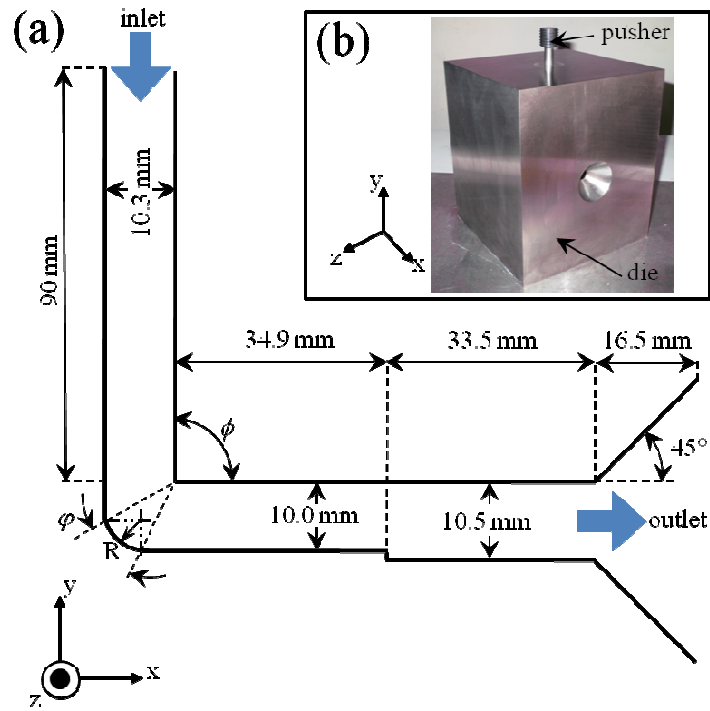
(a) Schematic of ECAP die channel geometry featuring the die angle ϕ , the outer corner angle φ , and the outer fillet radius, R . (b) A photograph of the ECAP die and the pusher.
